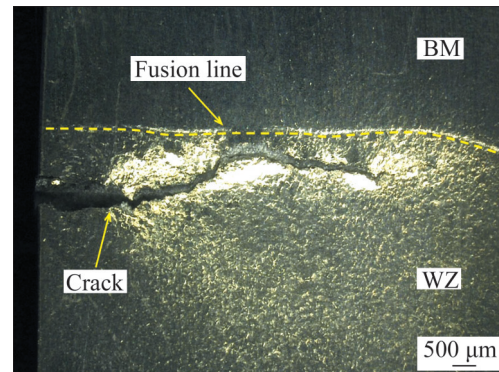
OM image of fatigue fracture path of welded joint
